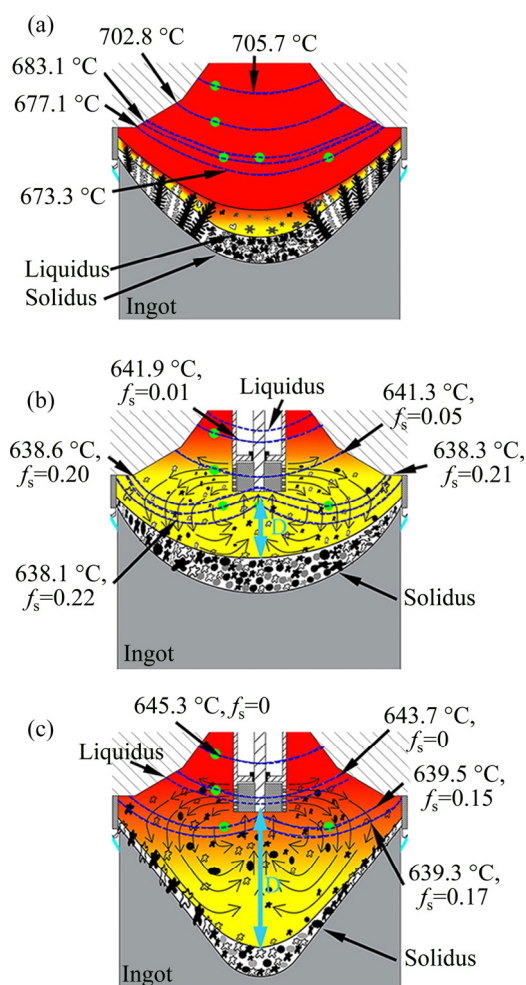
Schematic diagram of solidification process: (a) Conventional DC, 65 mm/min; (b) With shearing, 65 mm/min; (c) With shearing, 85 mm/min (f_s —Solid fraction)
